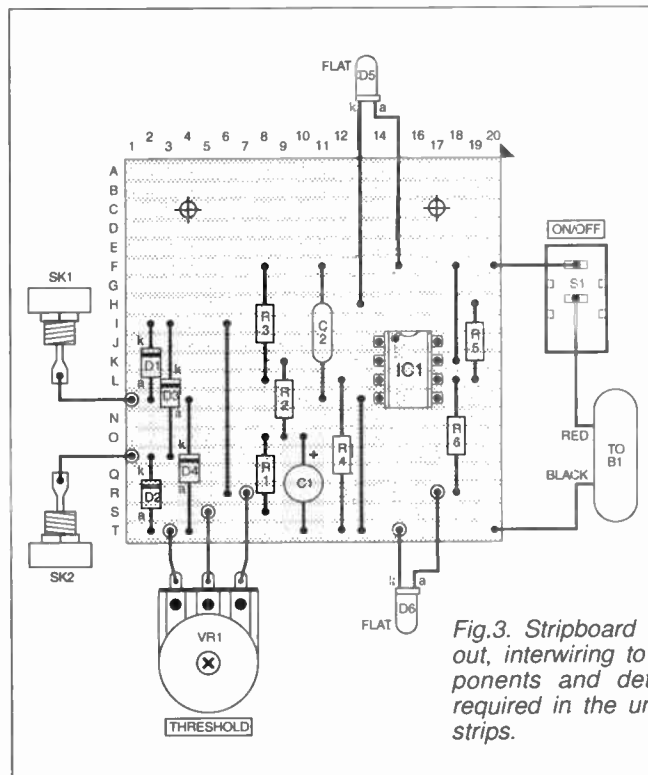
Stripboard component layout, interwiring to off-board components and details of breaks required in the underside copper strips.
